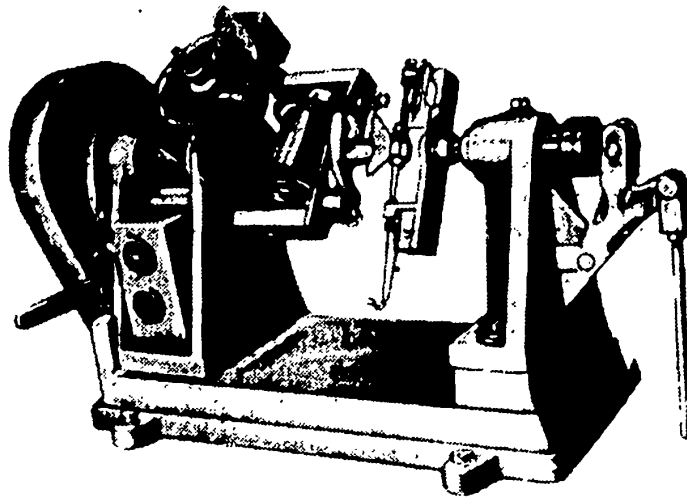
SNYa-3 Machine Tool for Winding of Armatures
